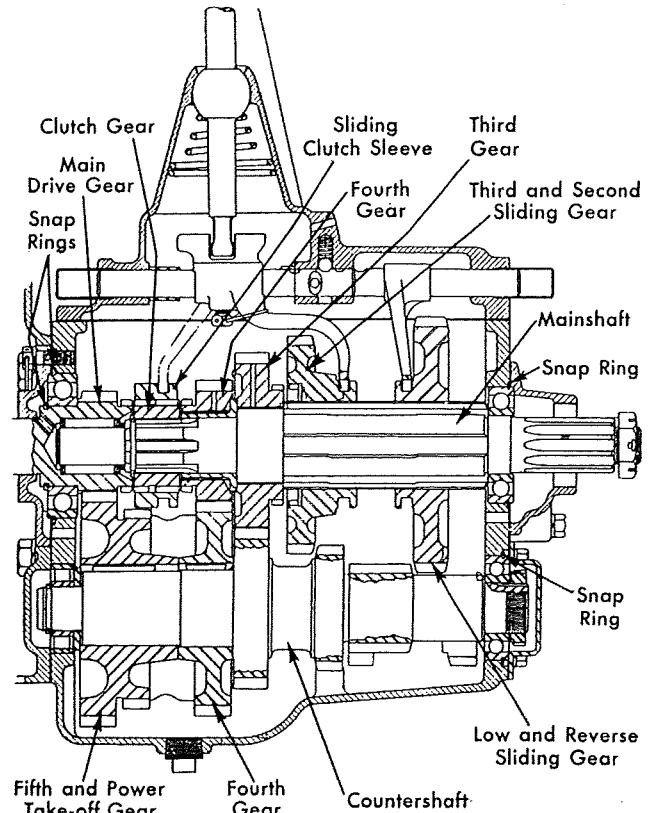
Group No. 58 Brown-Lipe 2252, 2253
